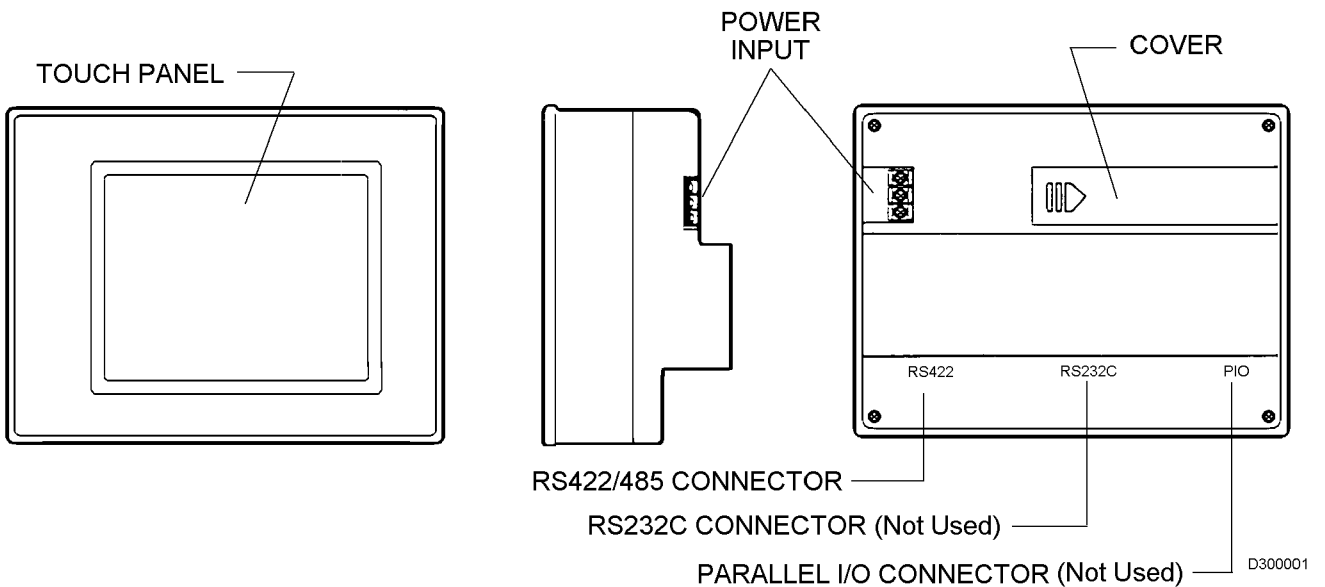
"MOM" DISPLAY ASSEMBLY
